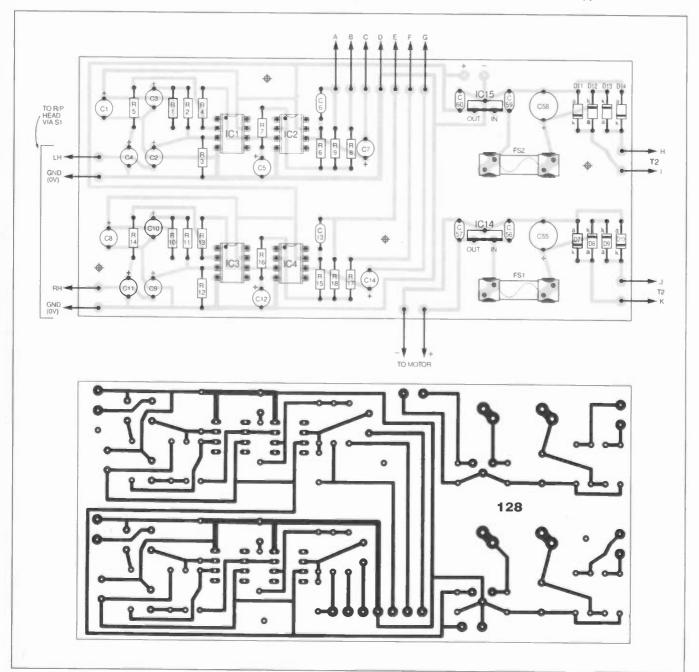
Playback/Power Supply printed circuit board component layout and full size copper foil master.
